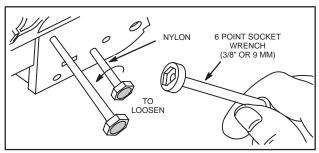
REMOVING FUEL PICK-UP TUBES, TYPICAL
